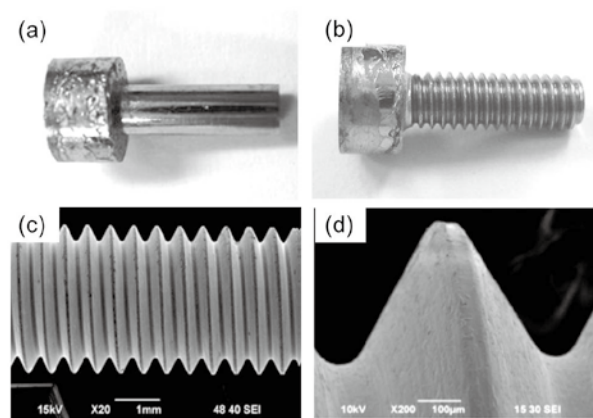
(a) Pre-form for metallic glass (MG) bolt processed by squeeze casting; (b) thread-rolled MG bolt at RT (293 K); (c) SEM microphotograph of screw thread; (d) magnified image of ridge, groove, and flank of the screw thread (c)
